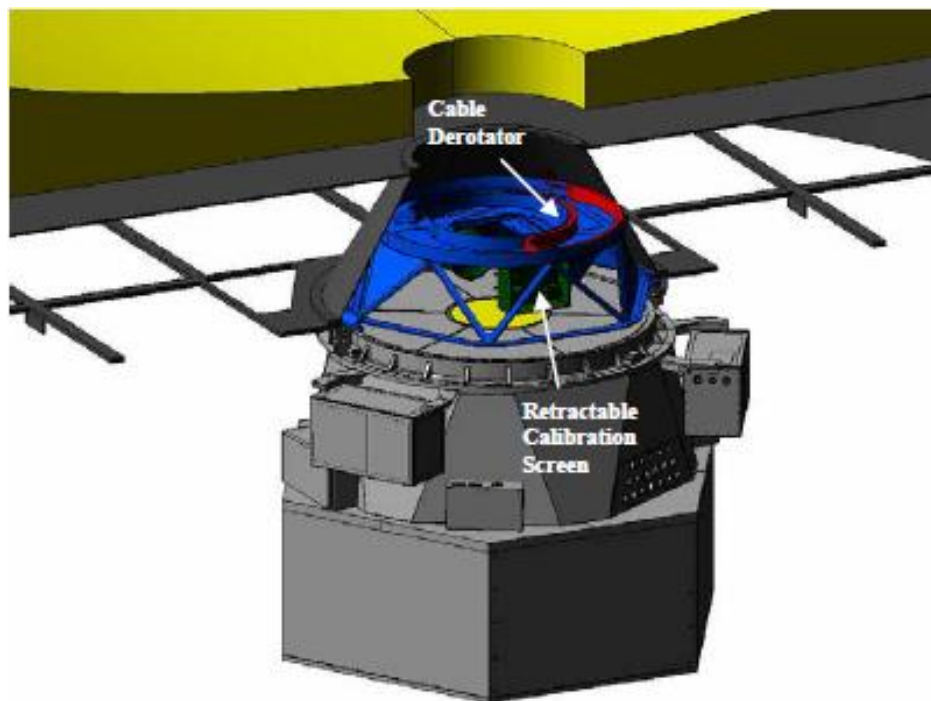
Binospec along with the retractable calibration screen/cable derotator mounted on the MMT rotator bearing.
